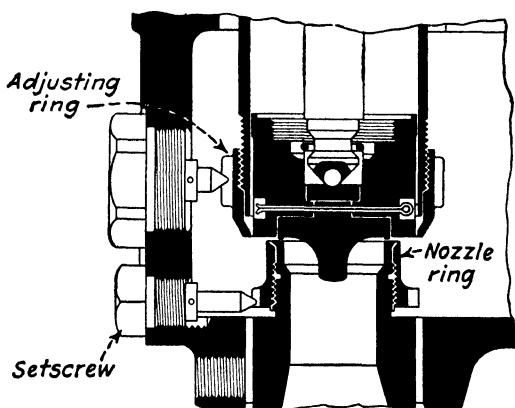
Set blowdown range by positioning the adjusting ring. Make increment settings with nozzle ring. (Courtesy of Crosby Steam Gage & Valve Co.)
